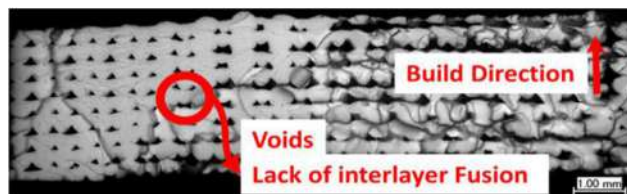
Micro fractographs of 3D printed samples using FDM. Different raster orientations plays and important role in mechanical behavior of parts [7]
